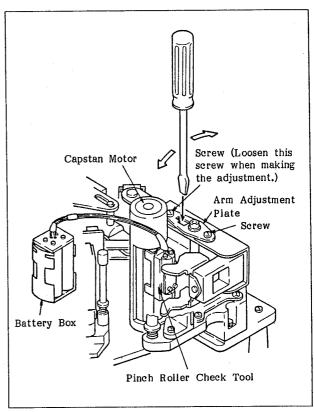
Fine Adjustment of the Pinch Roller Plate Azimuth
